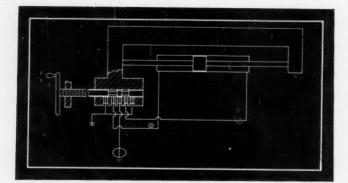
Simple servo valve arrangement with feedback obtained by making the valve body and slide integral
